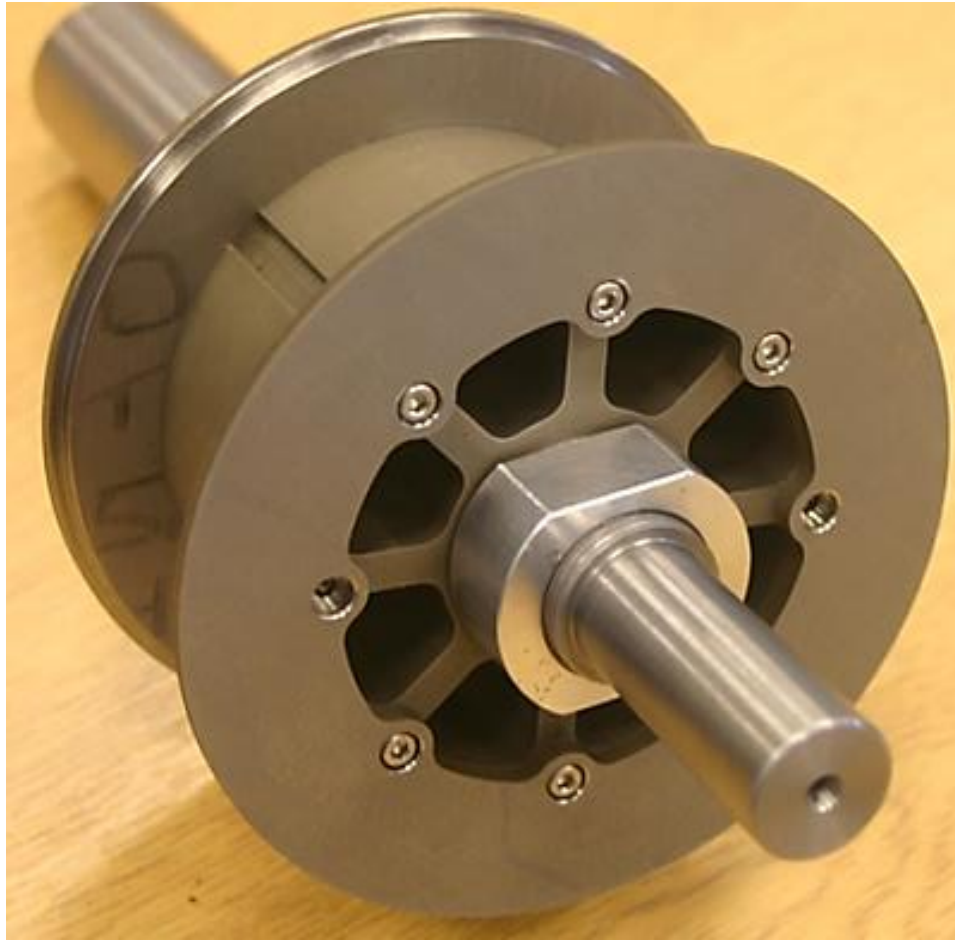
Assembly of the hub, end-plates and a temporary shaft
